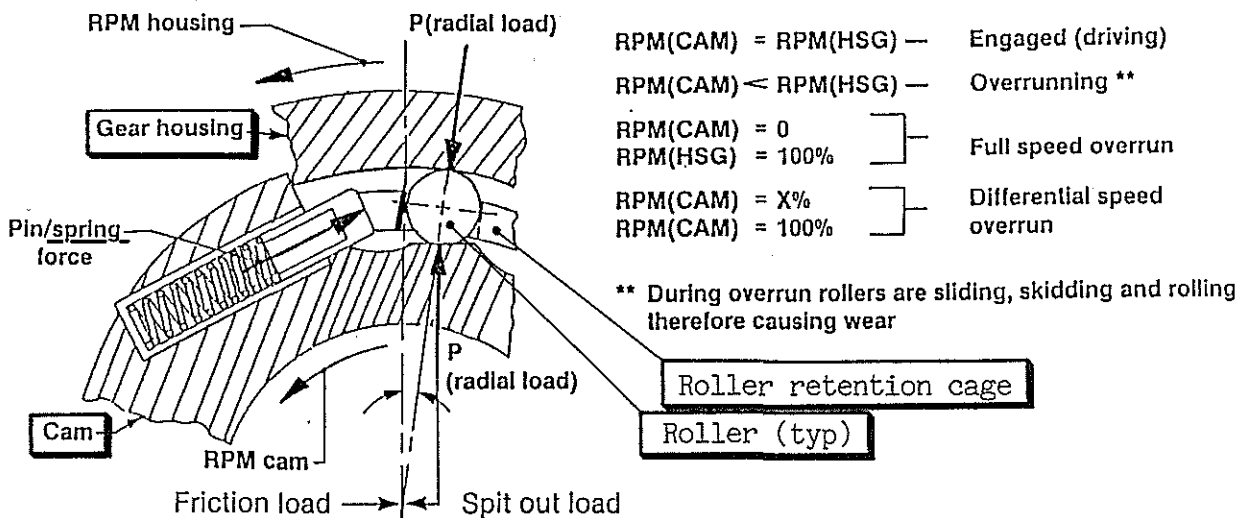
part of the ramp roller clutch (FWU) cross section; operating conditions
